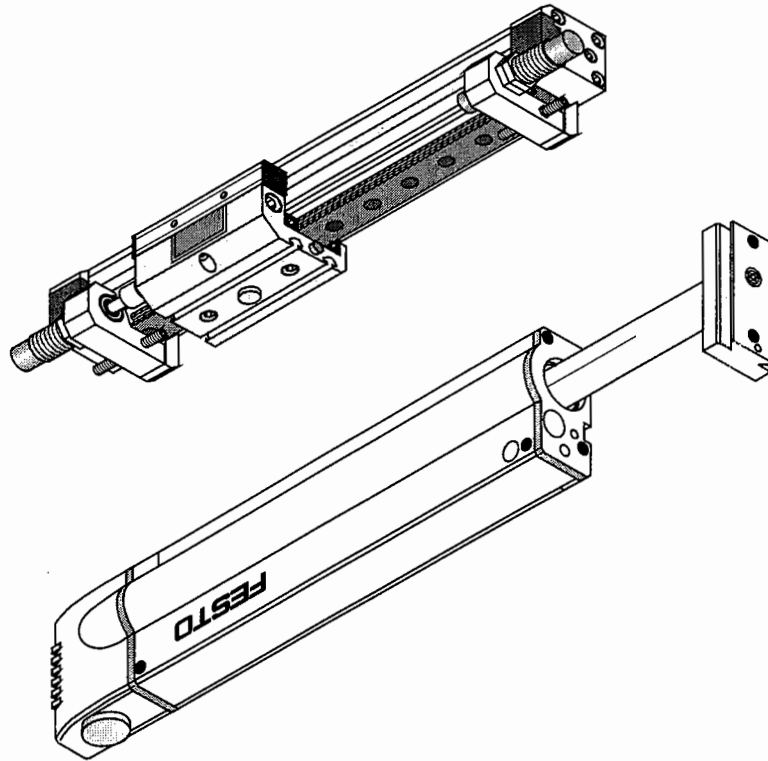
Linear axes with piston rod and rodless cylinders
